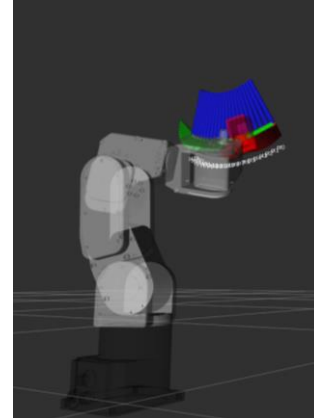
SADDLE WELD PAUT INSPECTION PATH
